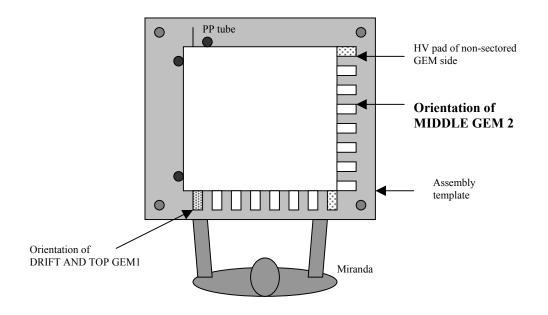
Orientation of assembly during the gluing of TOP-GEM1.
